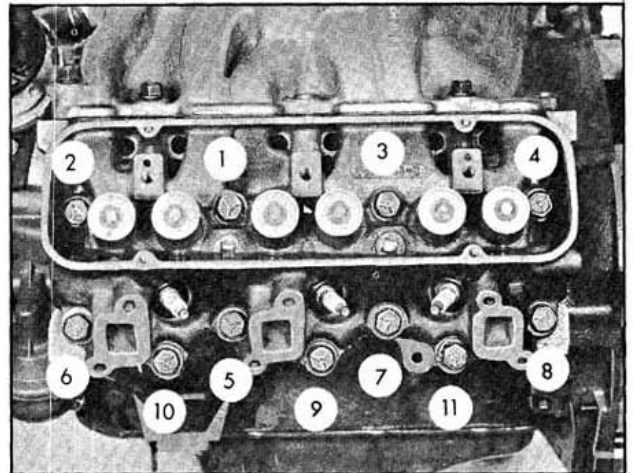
Cylinder Head Bolt Tightening Sequence
